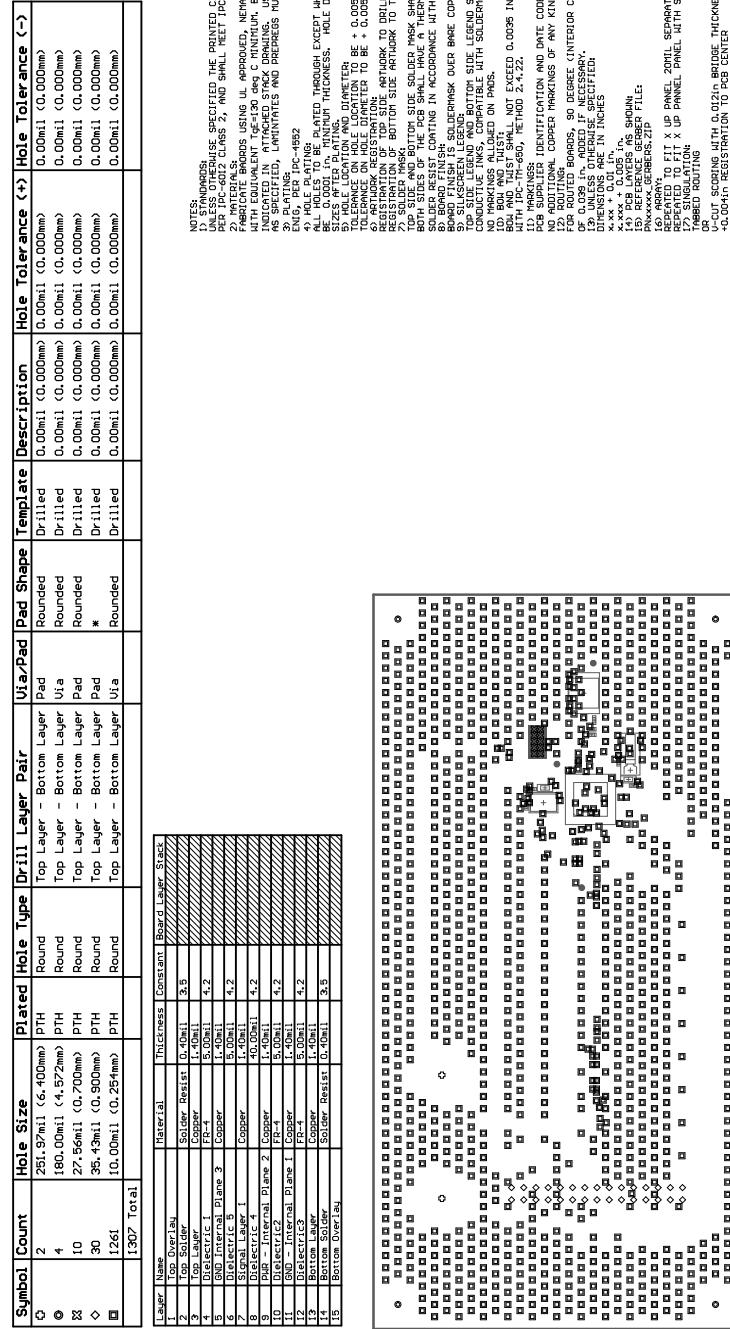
Embedded capacitance 6-layer design, mechanical drawing top.
